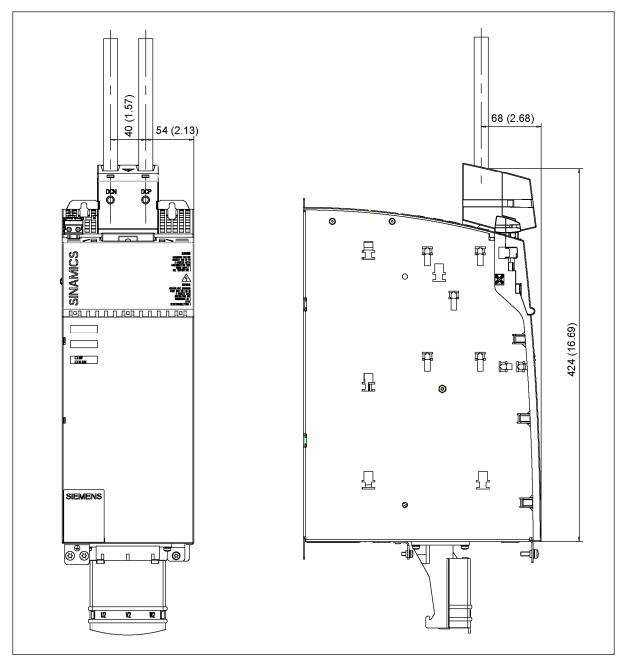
Dimension drawing of 150 mm component with DC link rectifier adapter for 35 mm² to 95 mm², all dimensions in mm and (inch)
